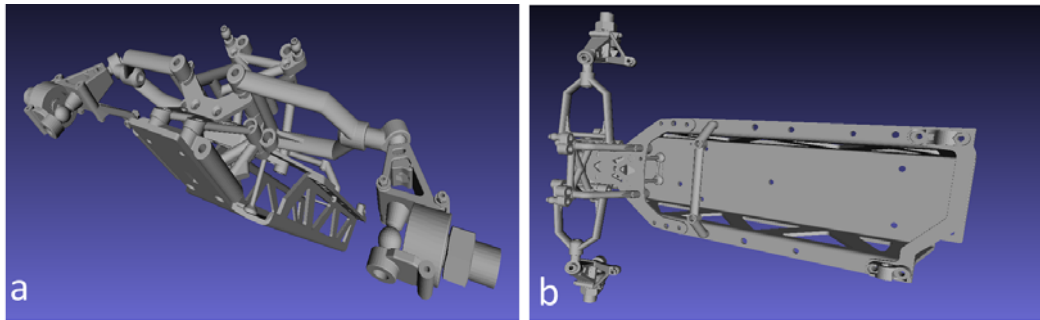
The 73 part chassis assembly: (a) View 1. (b) View 2.
